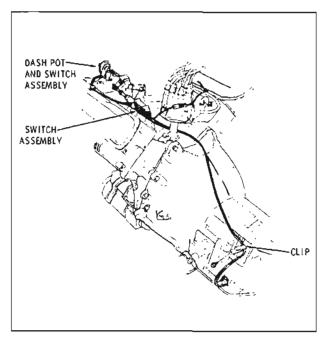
Transmission Control Cable—33 Series return spring to hold carburetor lever in slow idle position.
